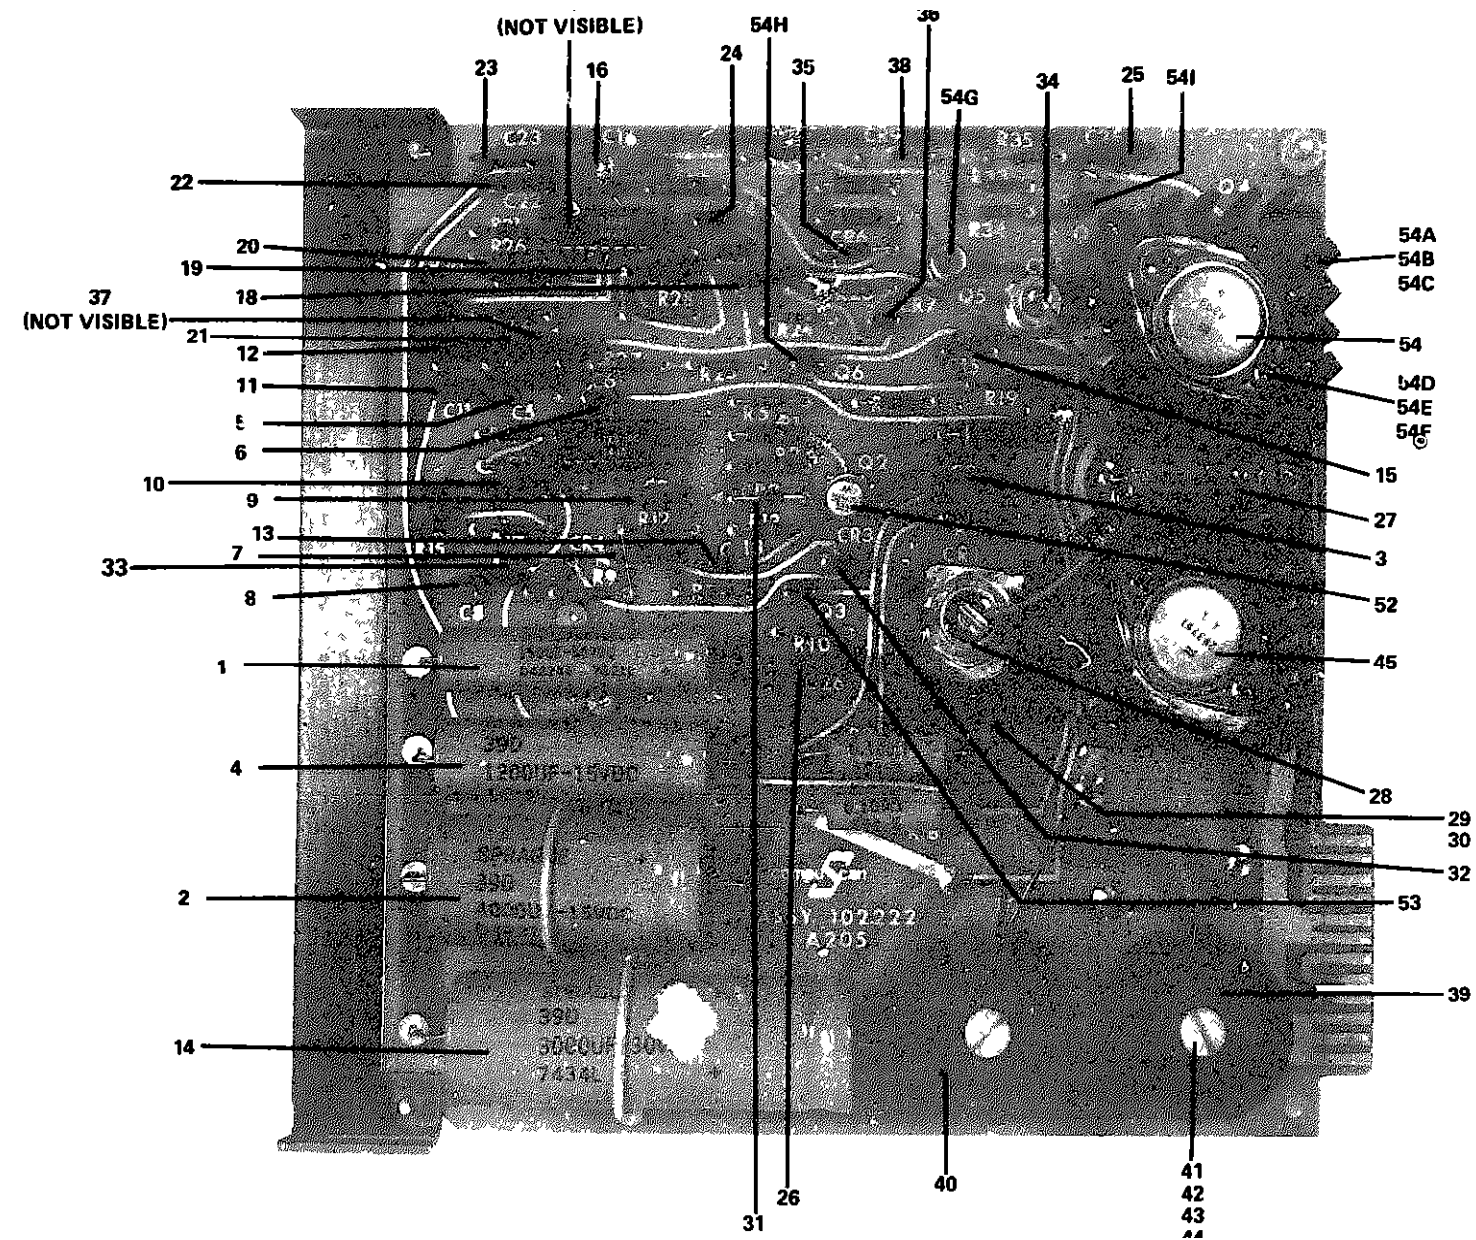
+12 Volt Read and Head Lamp Power Supply Assembly 1A2A2 (Sheet 1 of 2)
